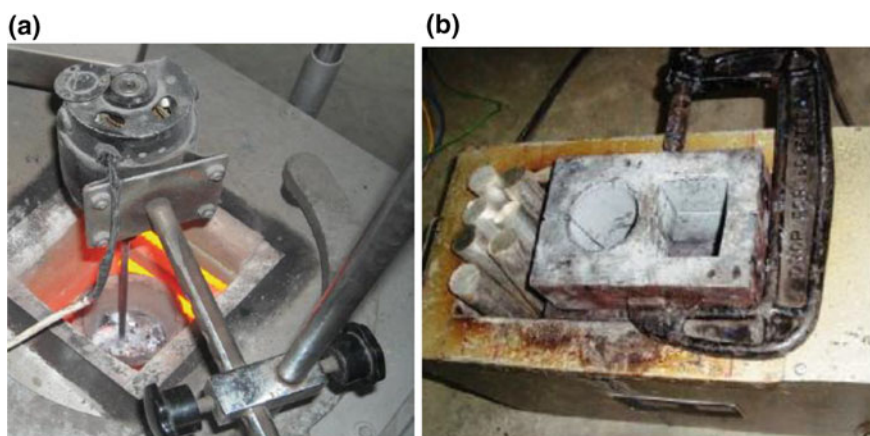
Stir casting equipment: a electrical furnace and b preheated permanent mould [39]
